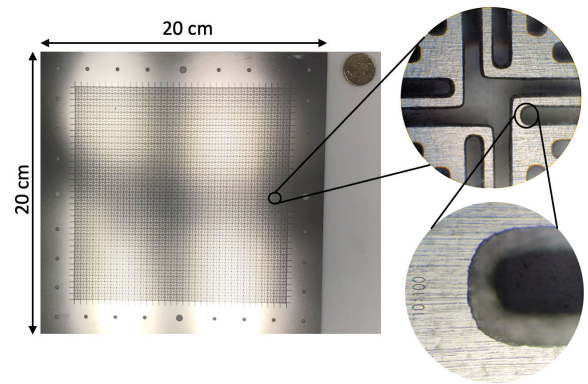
IFSS prototyped using a 0.2 mm thick sheet of stainless steel 304 and a zoomed view of a unit cell.
